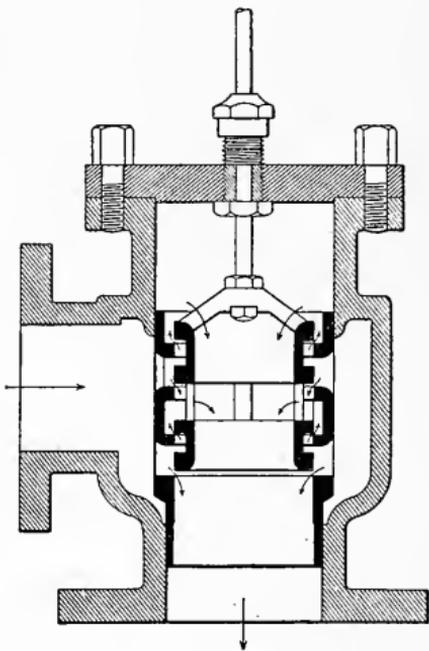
Section of Valve and Valve Seat of Waters Governor
